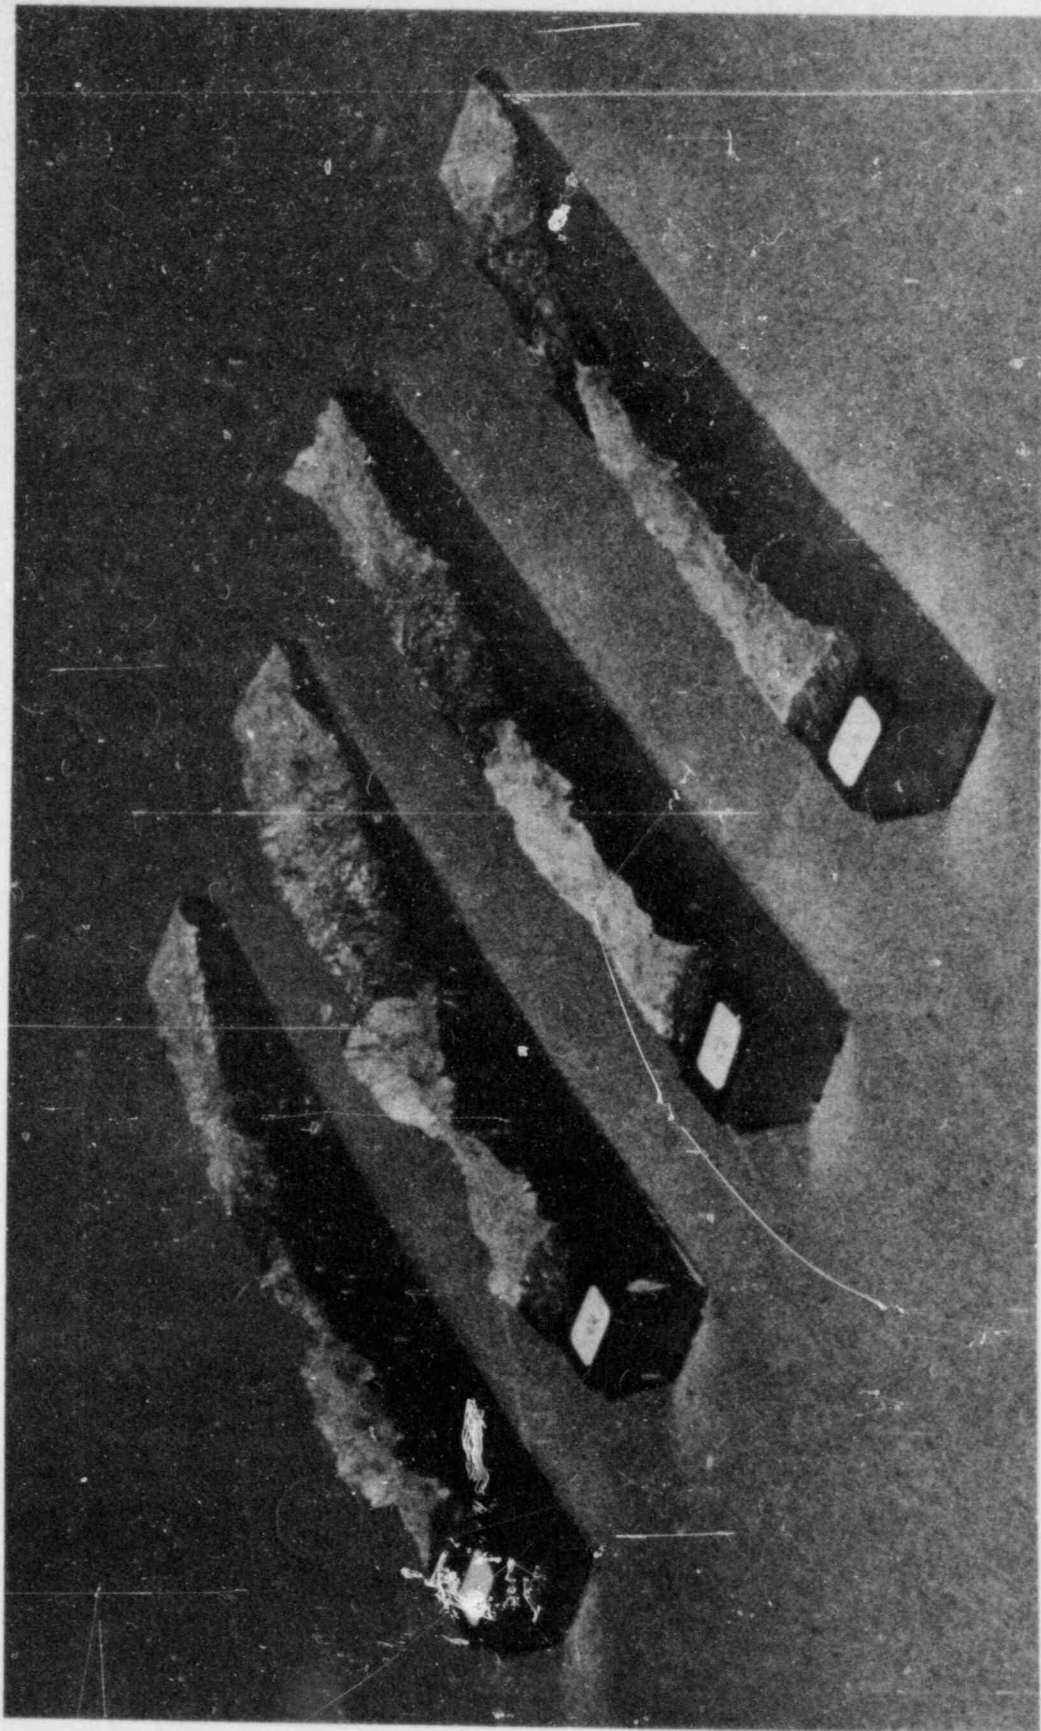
Cast CF8M Test Specimen Fracture Surfaces. Specimens Numbered
